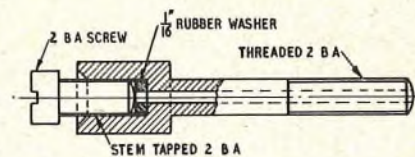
HOLLOW PRESSURE-TESTING BOLT.
